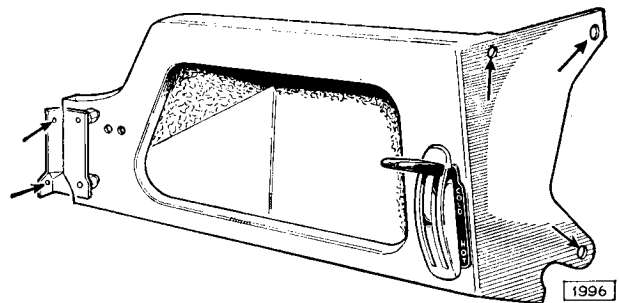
Location of the glovebox attachment points (Right hand drive).
